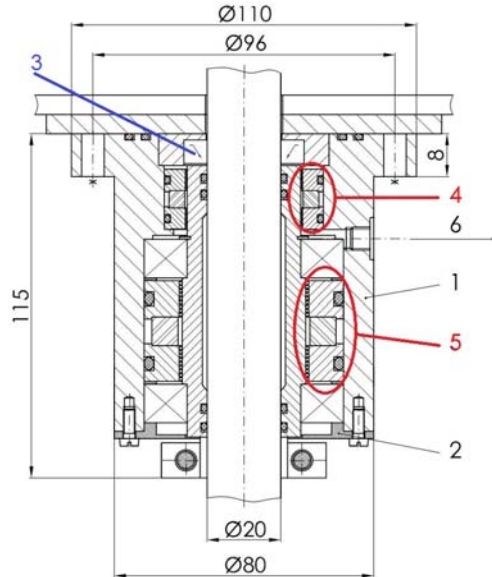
Sketch of magnetic fluid – mechanical seal for high vacuum deposition system;
